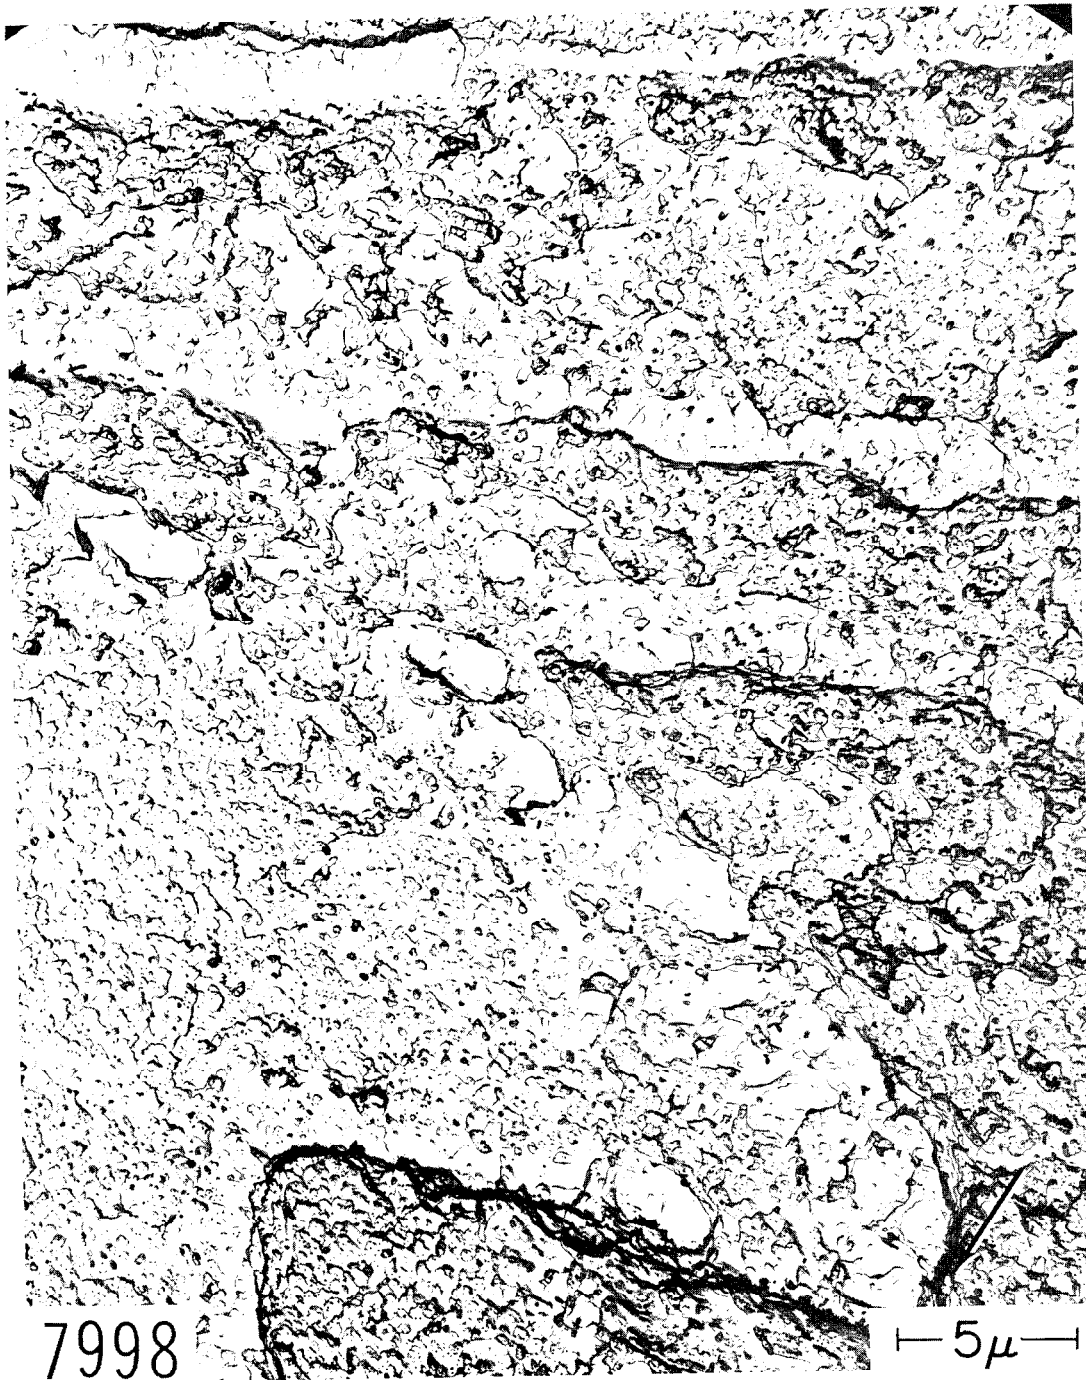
Room temperature monotonic plane-strain fracture surface of 7075 T6 aluminum alloy plate. Cellulose acetate-carbon replication technique. Palladium shadowed. 6000X.
